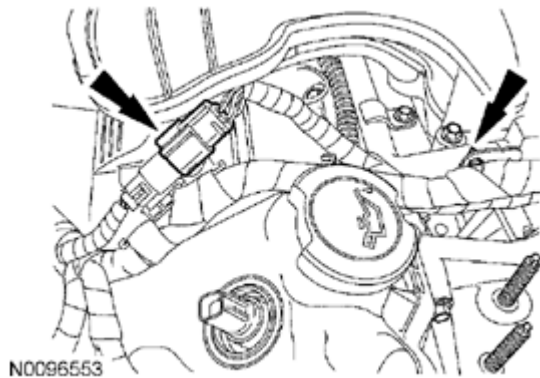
Locating Fuel Injector Wiring Harness Electrical Connector And Wiring Harness Retainer
